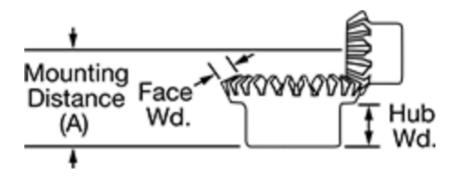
Shows the clearance needed for the bevel and pinion gear, The mountain's distance (A) will be kepts at 27 mm. The horizontal gear has 20 teeth while the vertical bevel has 40 teeth. The hub height will stay at 10mm.
